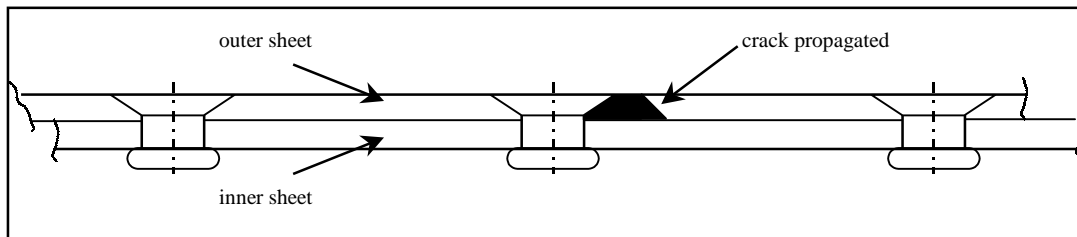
Aluminium joint, small crack on fuselage surface, NDT detectable
